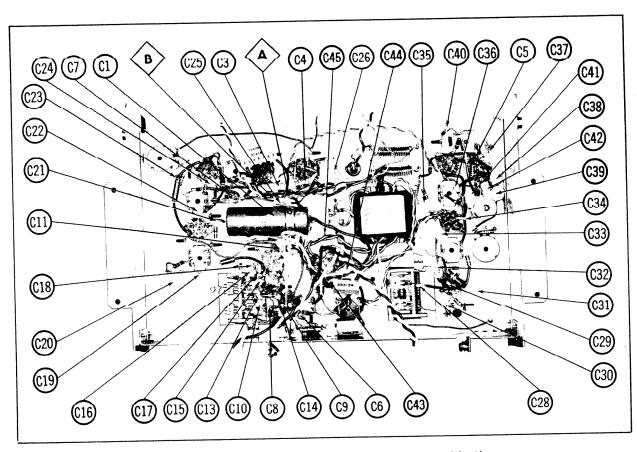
AM-FM Tuner - Bottom View, Capacitor Identification.
